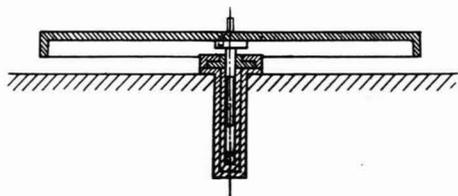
CONSTRUCTIONAL DETAILS OF TURN-TABLE
